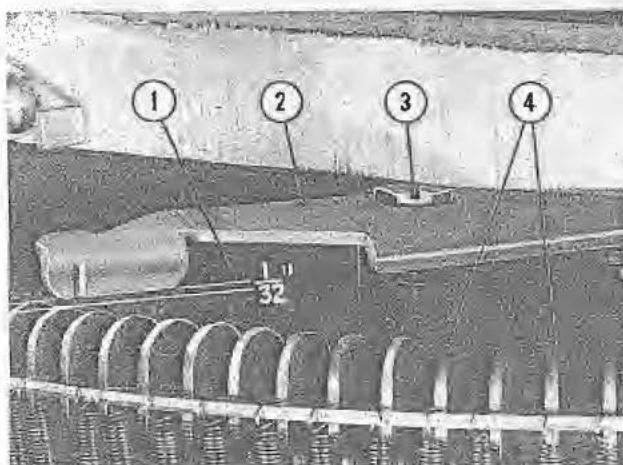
SELECTOR CRANK ARM CLEARANCE ADJUSTMENT
